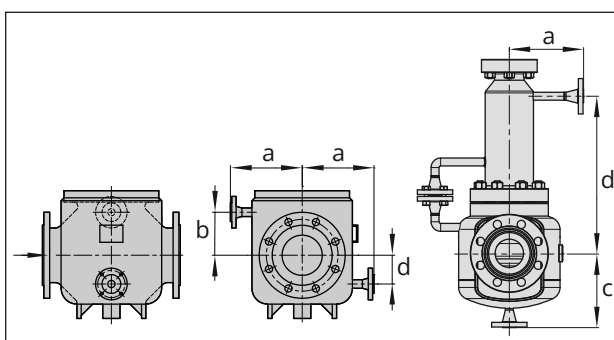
Type 3251 with heating jacket · Dimensions on request
